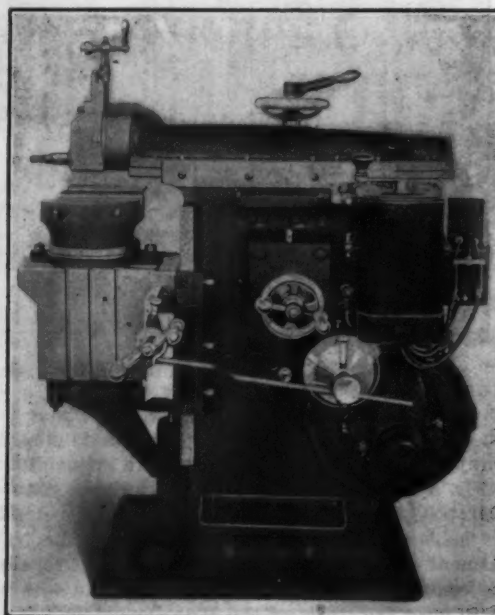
A Very Compact Variable Speed Motor Driven Flather Shaper.
